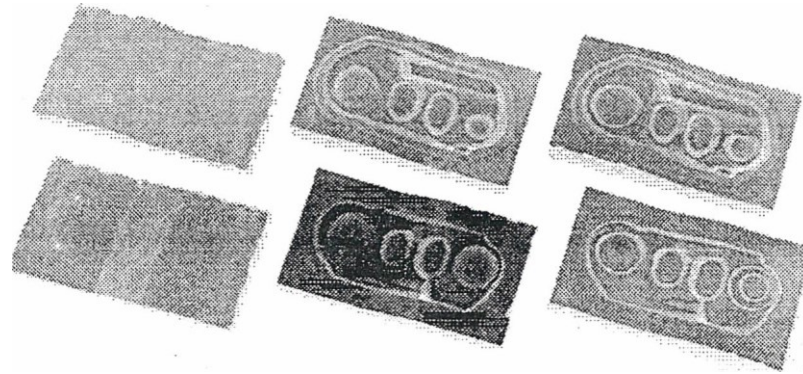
Dies for the simulation of hot forged crane link (3 forming steps preforming, blocking and finishing)
